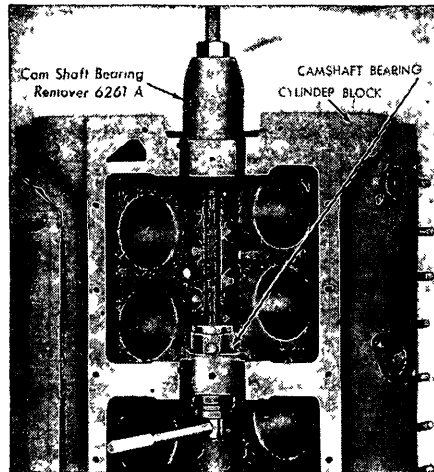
Removing camshaft bearings, 1935-52 V8 Ford and Mercury
